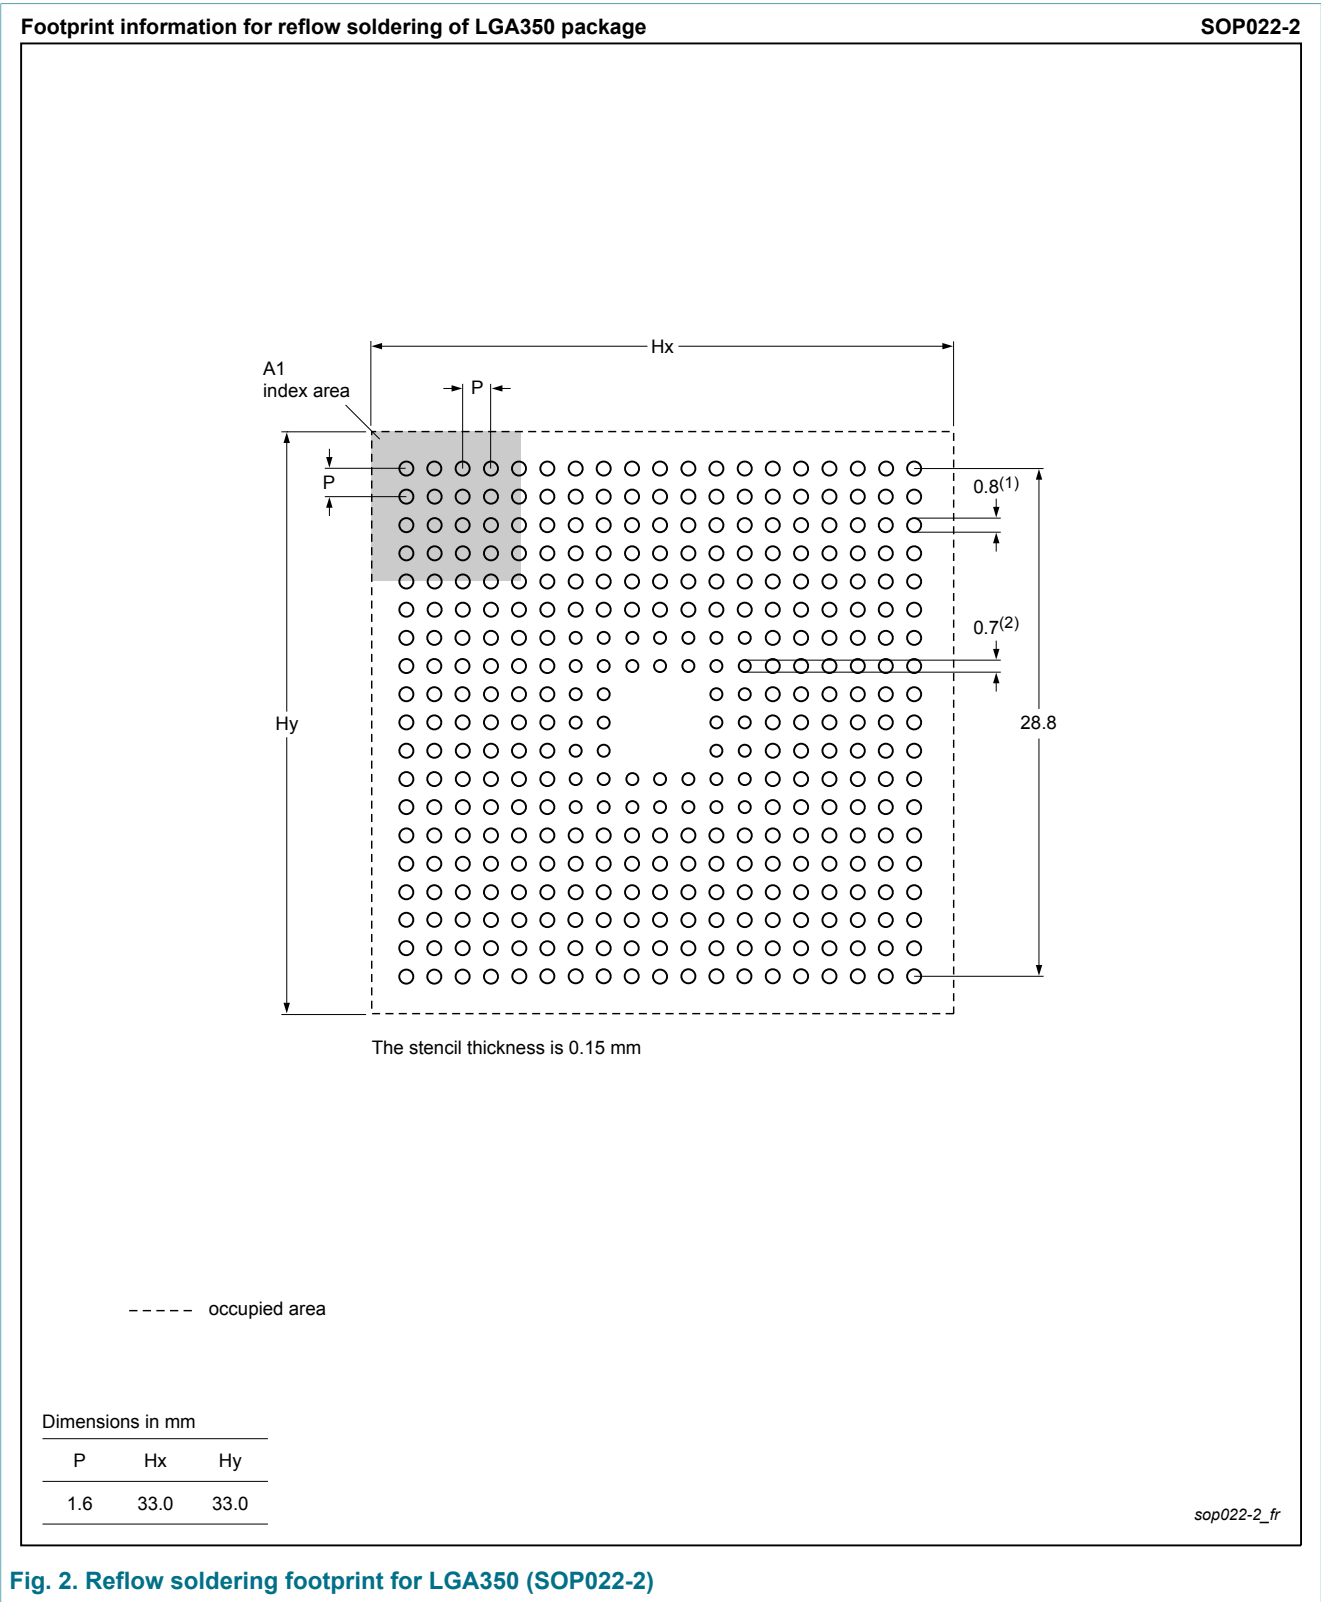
Reflow soldering footprint for LGA350 (SOP022-2)
